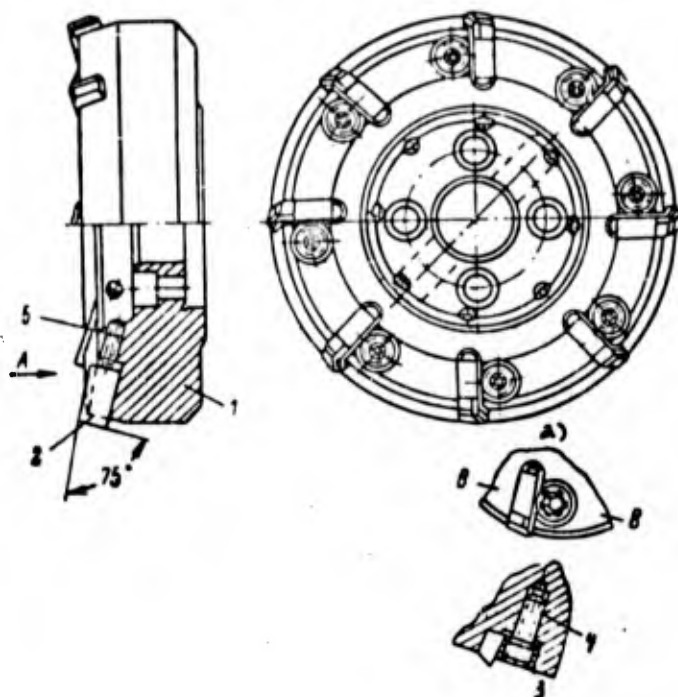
Clamp-On End Mill With Mechanical Mounting of Cemented-Carbide Bars, Designed by Orgtransmash
